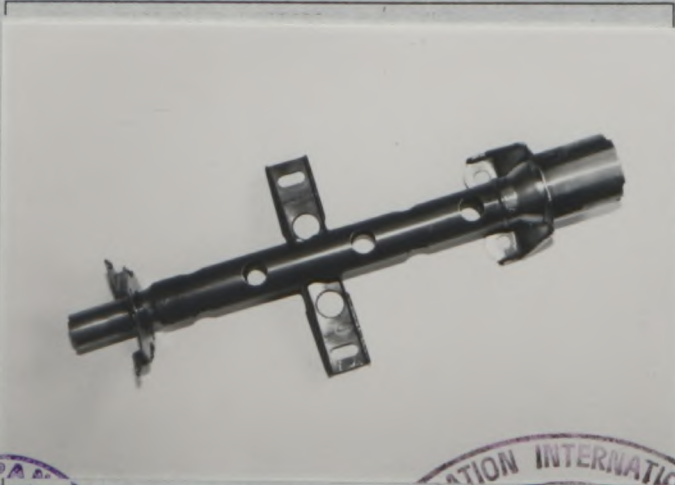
REINFORCED STEERING COLUMN TYPE C
